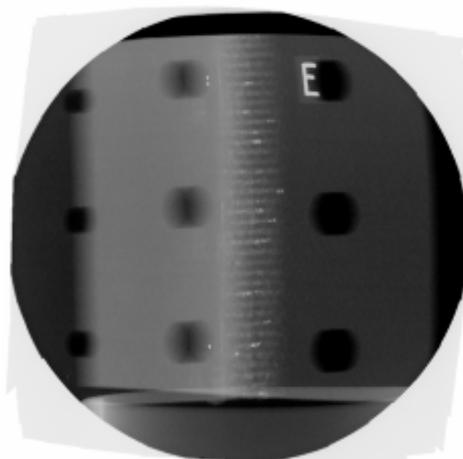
Digital radioscopy of a T-sewed CFRP composite showing defects after mechanical constraints.
